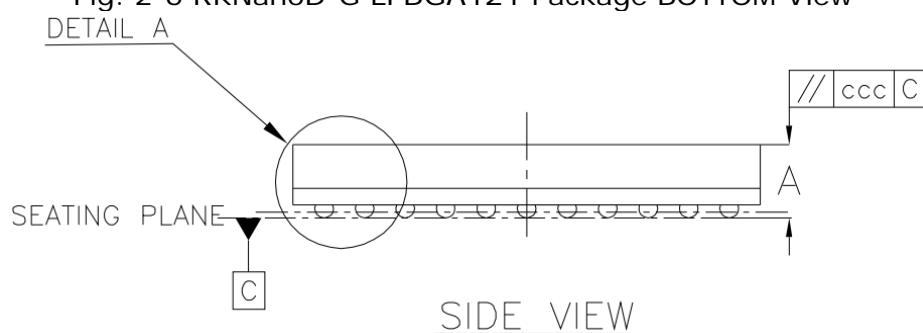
RKNanoD-G LFBGA121 Package SIDE View
